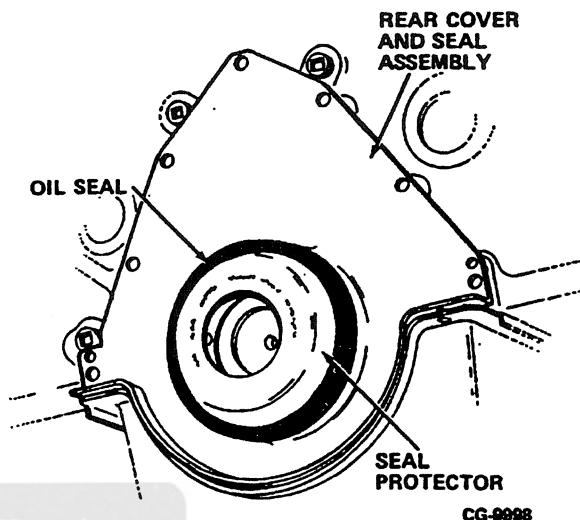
Location of Aviation Permatex™ #3 for Rear Cover Gasket; and Seal Protector Installed Over Crankshaft Flange
